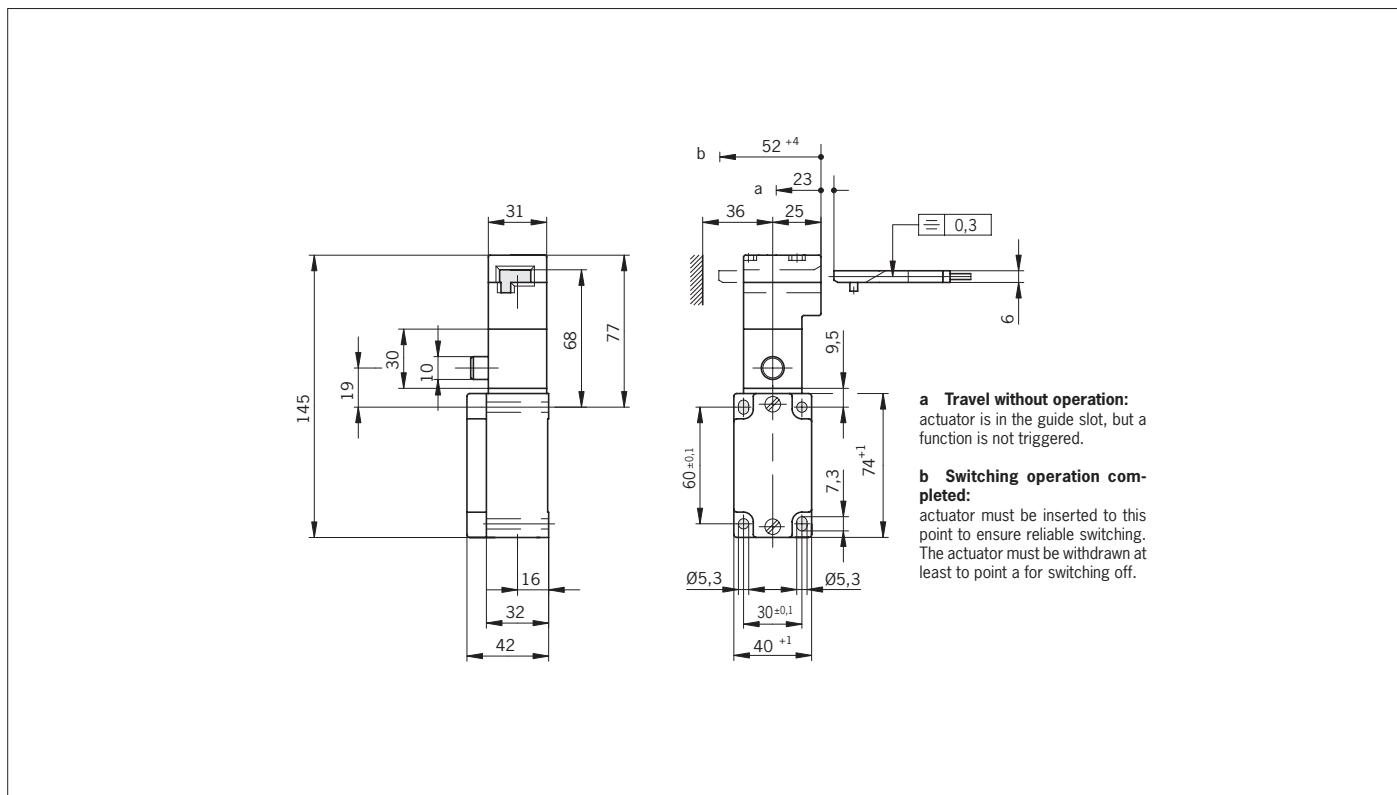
Dimension drawing for NZ1VZ...VSH with cable entry
